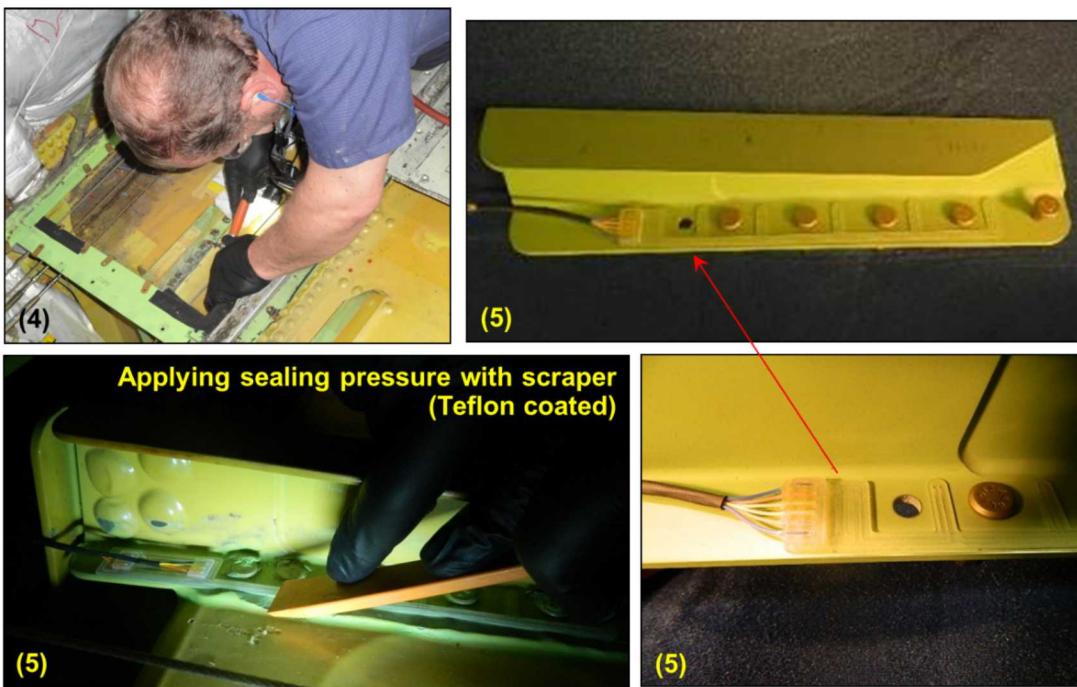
CVM Installation Steps - 4) CVM Surface Preparation (light sanding, acetone & deionized water clean), and 5) CVM Sensor Placement on Wing Box Fitting
